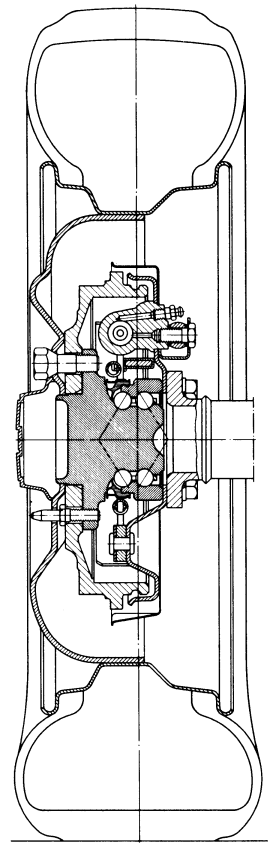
Rear wheel bearing on the Fiat Panda with a third-generation, two-row angular (contact) ball bearing. The wheel hub and inner ball bearing ring are made of one part, and the square outer ring is fixed to the rigid axle casing with four bolts (picture: SKF).
